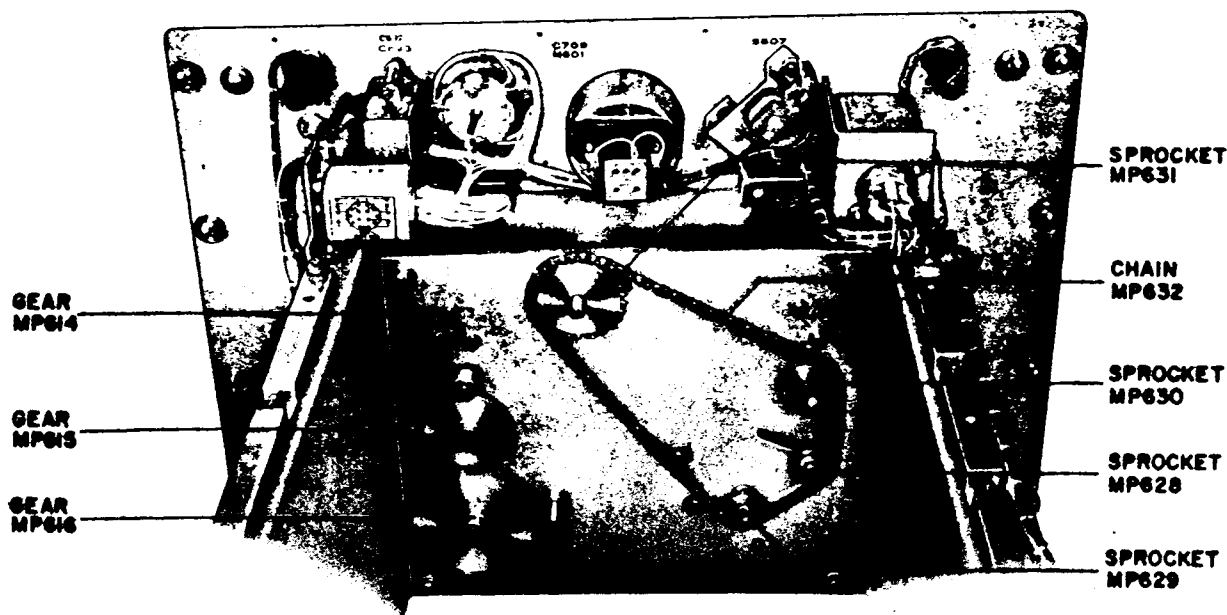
Electrical Frequency Control C-2861/WRT-1, Interpolation Oscillator Gear Train, Replacement of Parts on Gear Box Back Plate
